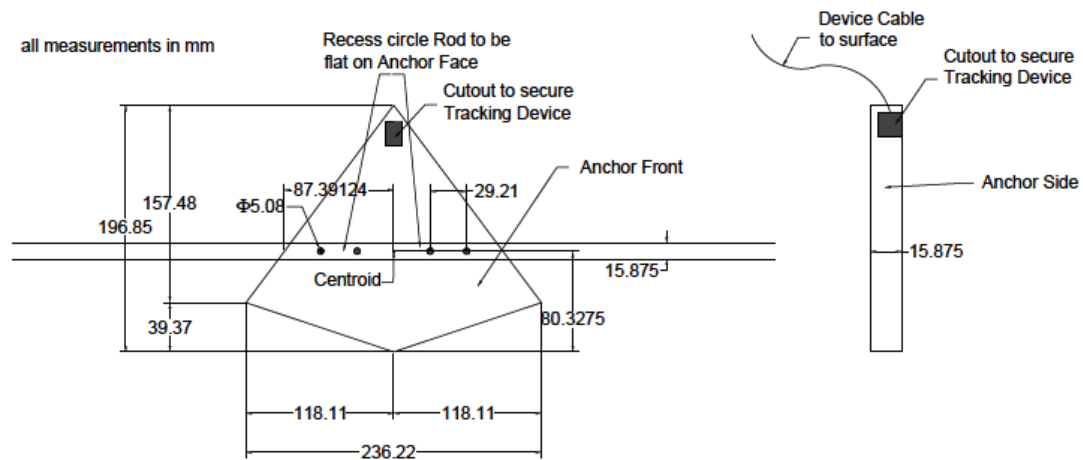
Large anchor model dimensions with rod attachment on the side and cut-out for the tracking device for pitch rotation (vertical fluke) tests.
